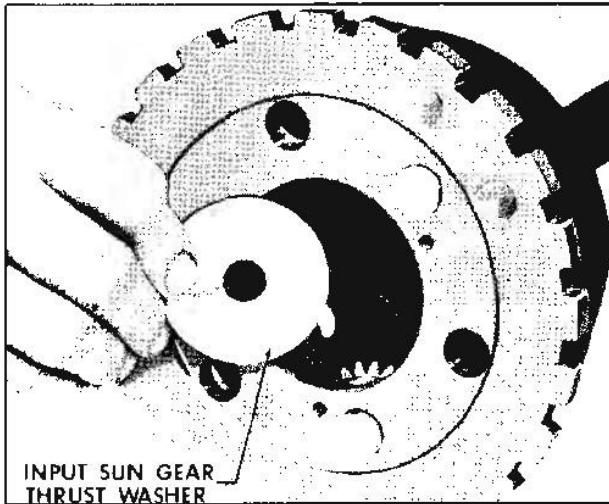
B-89 Removing Input Sun Gear Thrust Washer
